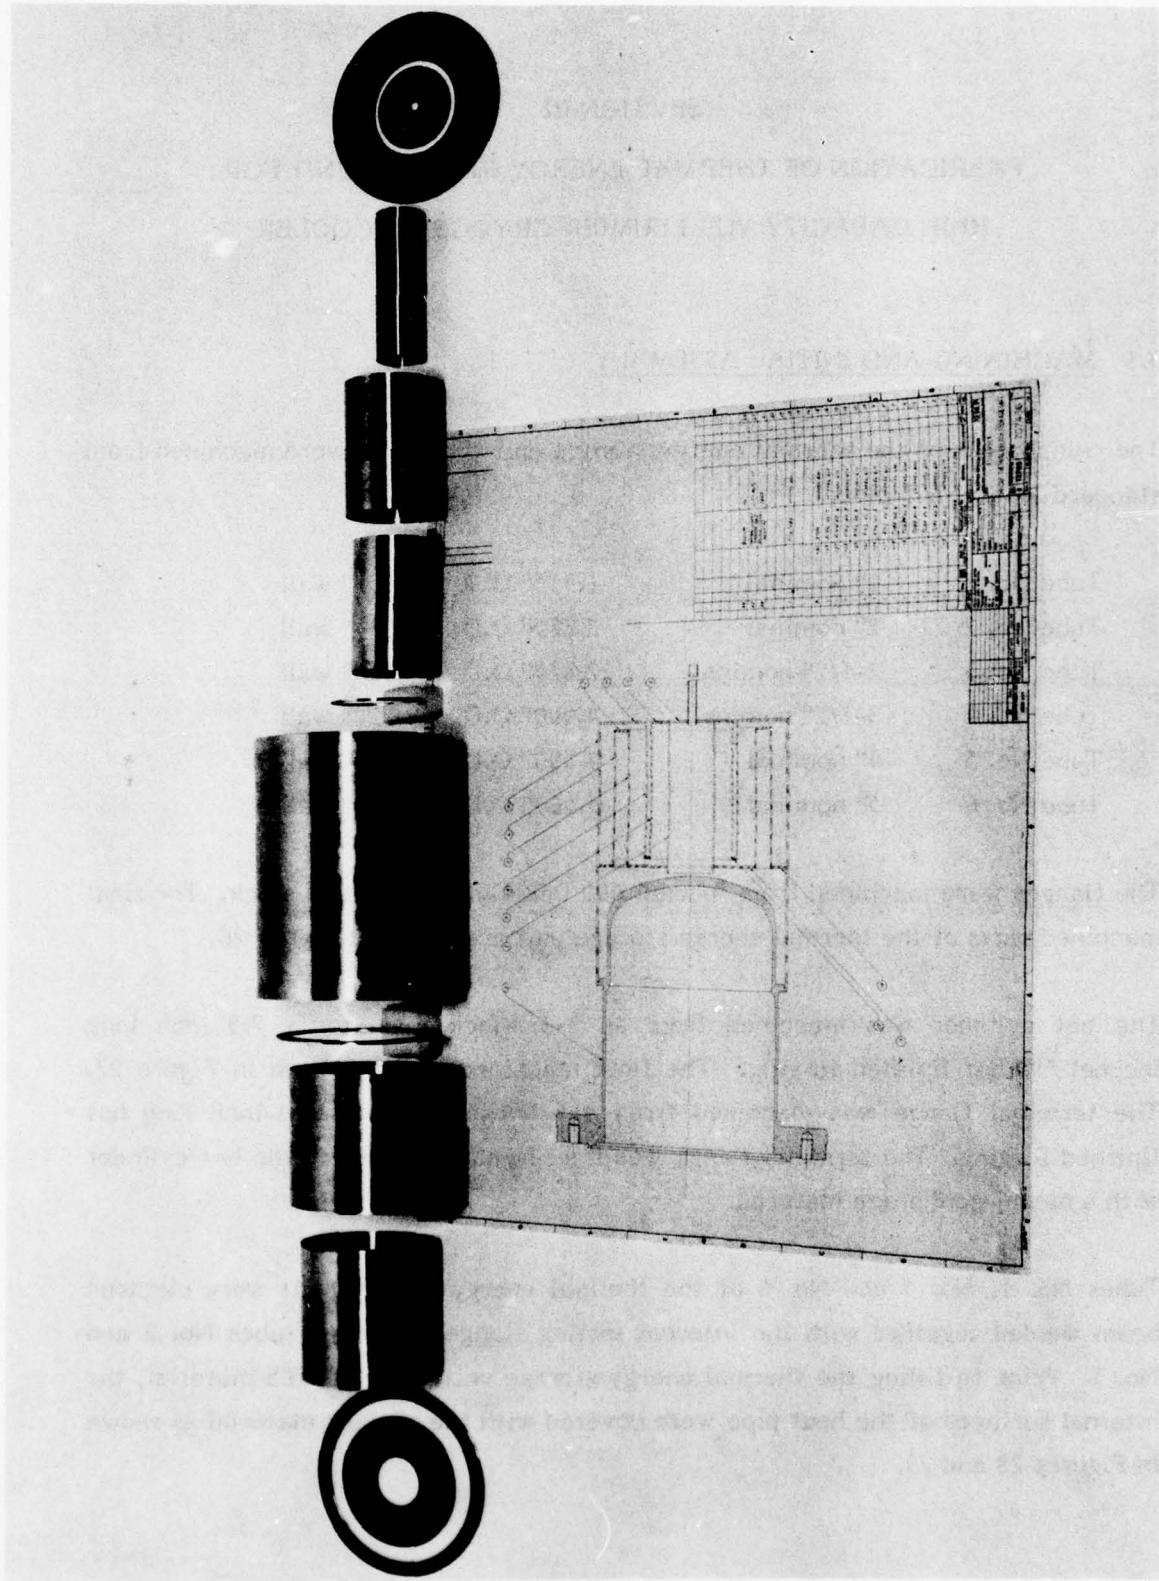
Thermal Energy Storage Unit Parts Prior to Electron Beam Welding
